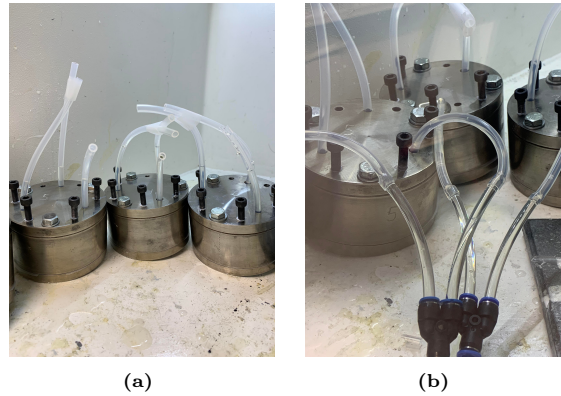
Molding: (a) Filled cups with fluid arising in the molding holes seen in the tubes; (b) Filling.
